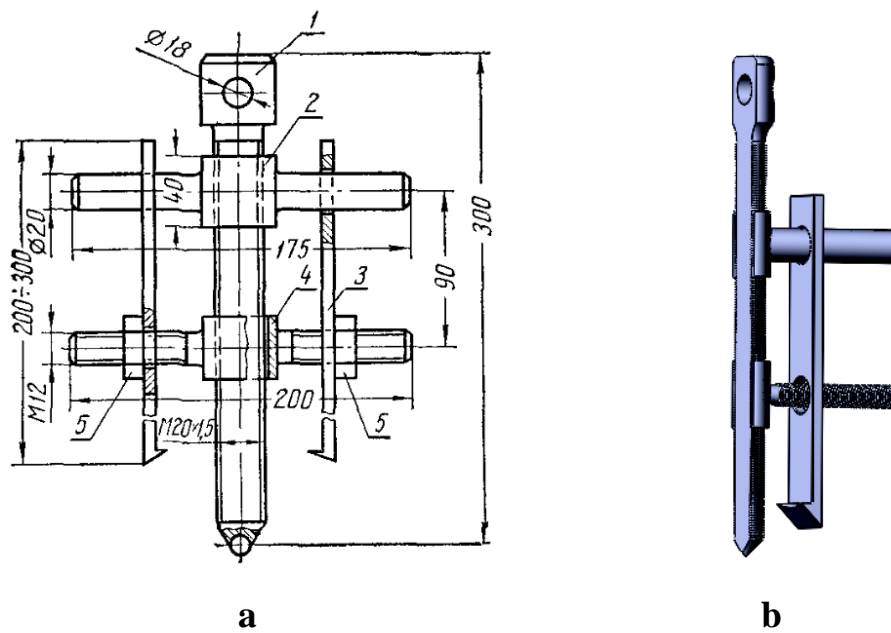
Tractor bearing stripper: a – assembly drawing [2]; b – 3D model
